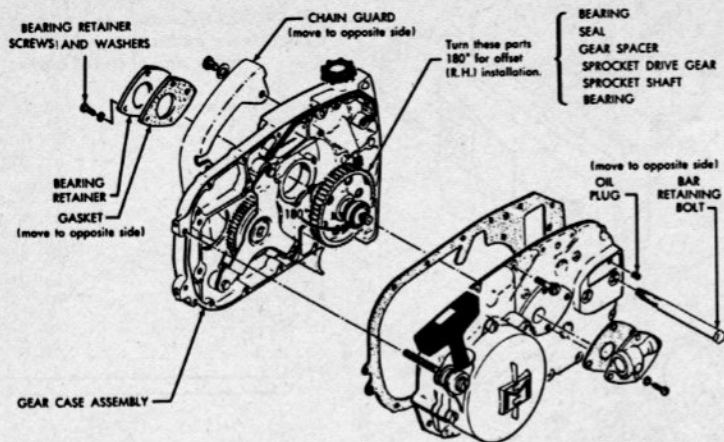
Chain bar can be moved from left side to right side of transmission by reversing transmission components as shown. When automatic oiler is mounted on left side of gear case it will not function unless bar pad oil passages are drilled. If offset operation is temporary, either pack oiler with Lubriplate or remove the oiler plunger. Refer to text.
